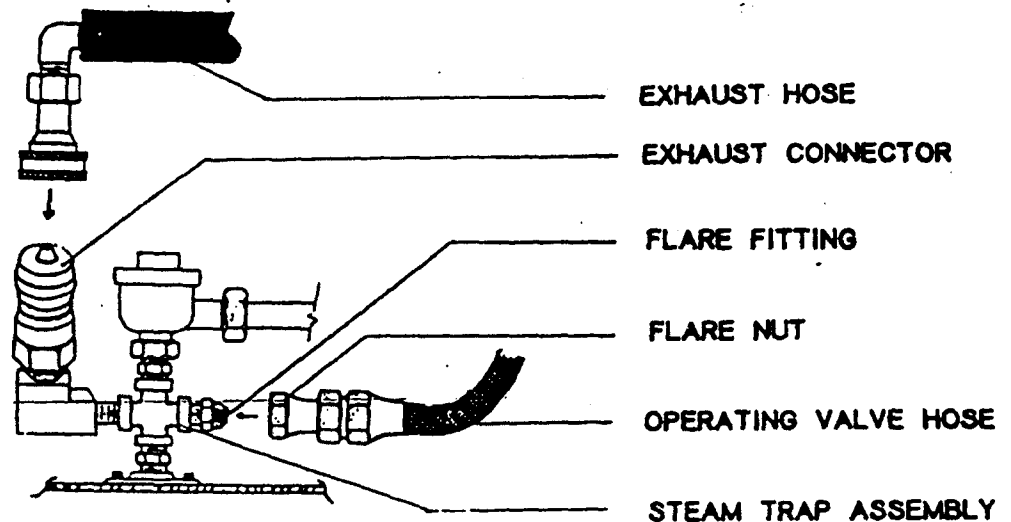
Operating Valve and Exhaust Hose Attachment.
